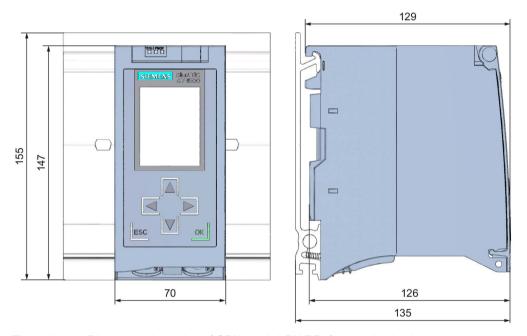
Dimensional drawing of CPU 1516-3 PN/DP, front and side views
